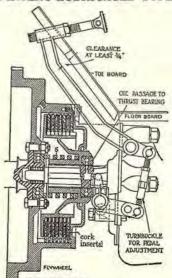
Sectional view of a multipledisk cork-insert lubricated type of clutch. Note adjustable foot-pedal. To remove the clutch it is first necessary to take off the gearbox; then the cap screws which attach the clutch-plate cover to the drum of the flywheel are removed, and the entire clutch assembly may be taken out.
